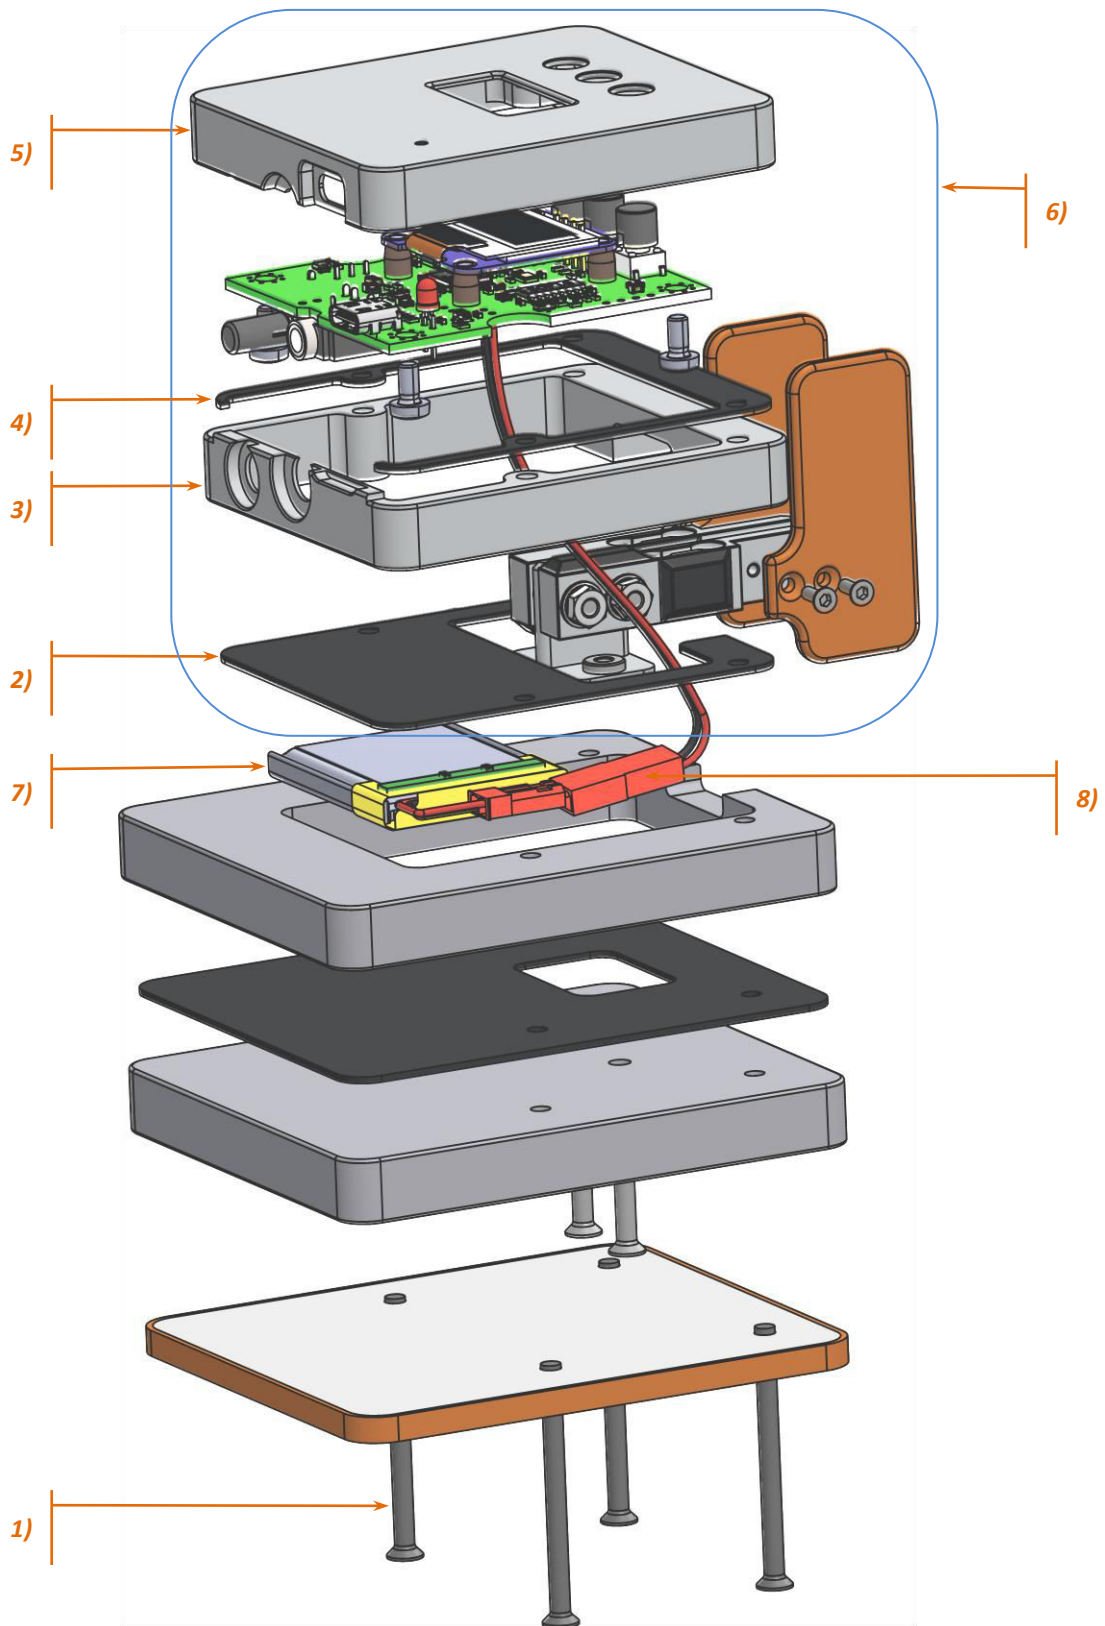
| ACOM 560 CW Paddle Disassembled
